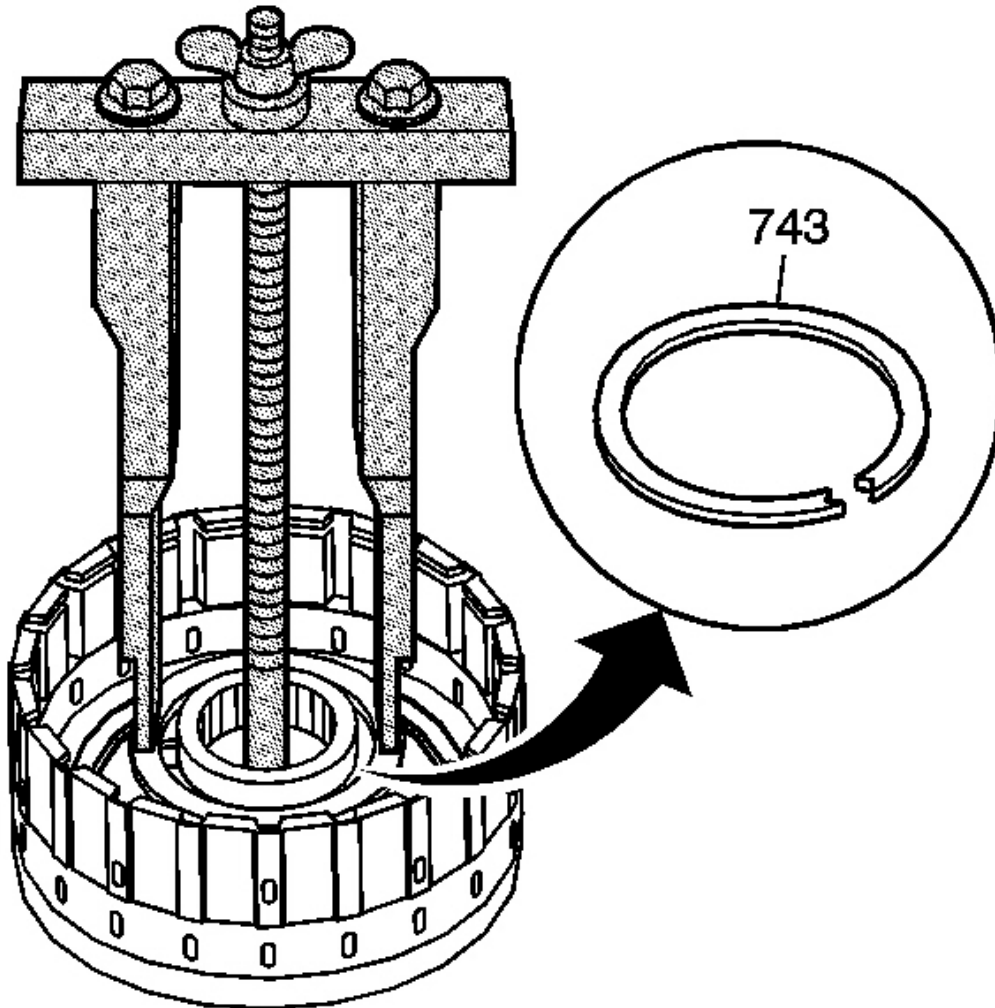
2nd Clutch Piston Return Spring Cap Removed
